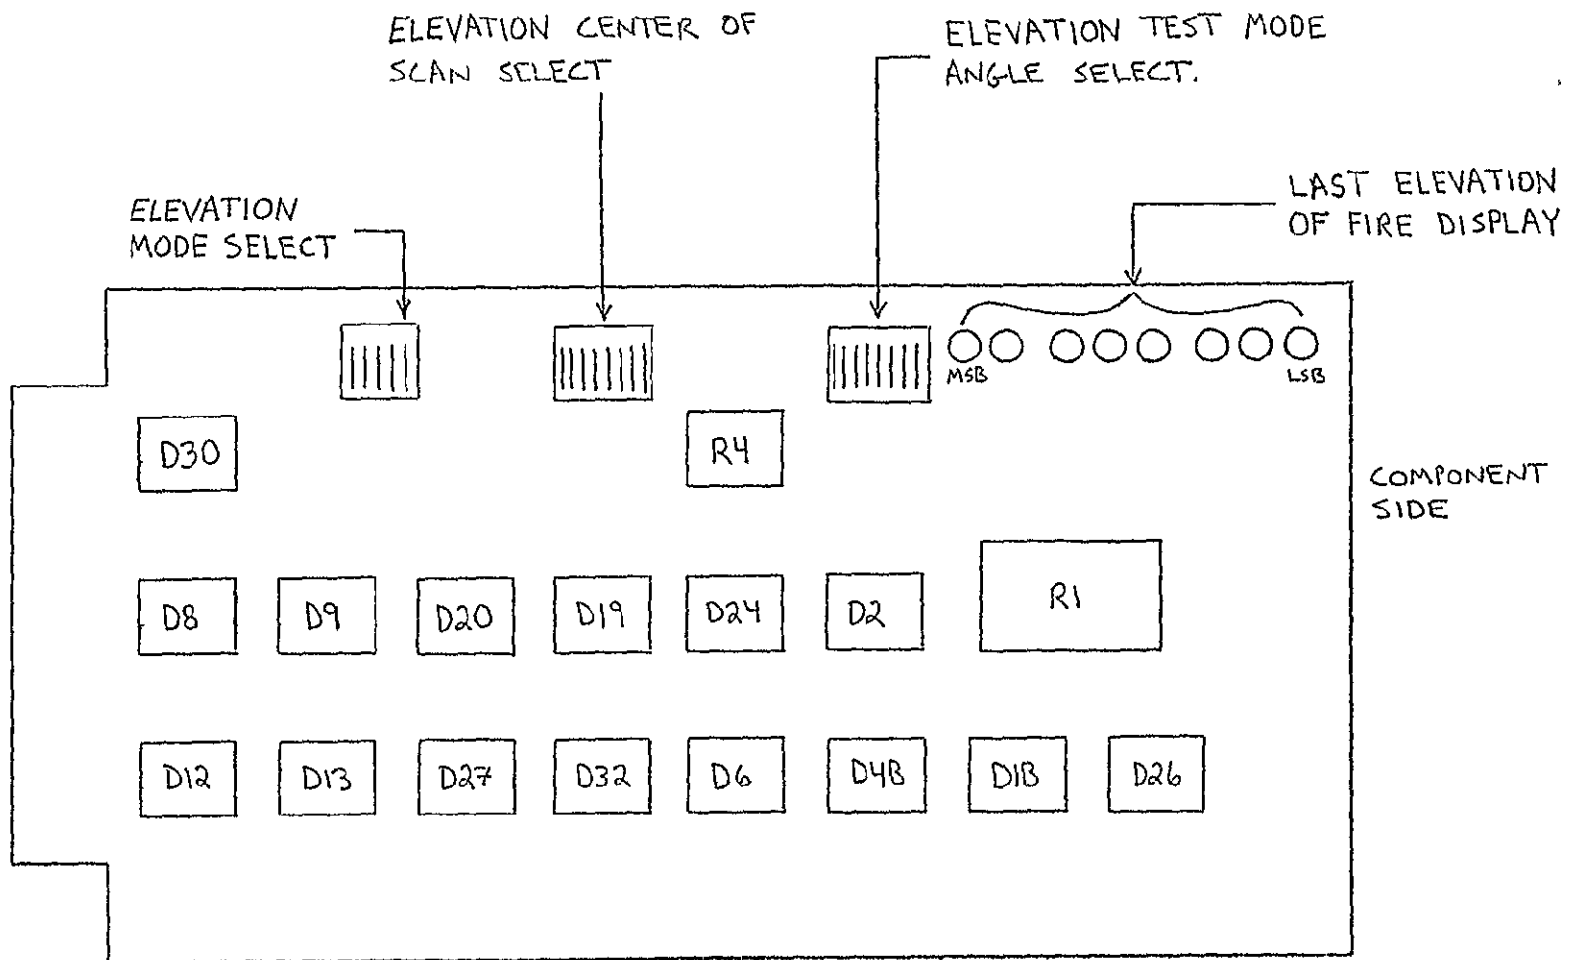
ELEVATION BOARD CHIP LAYOUT
